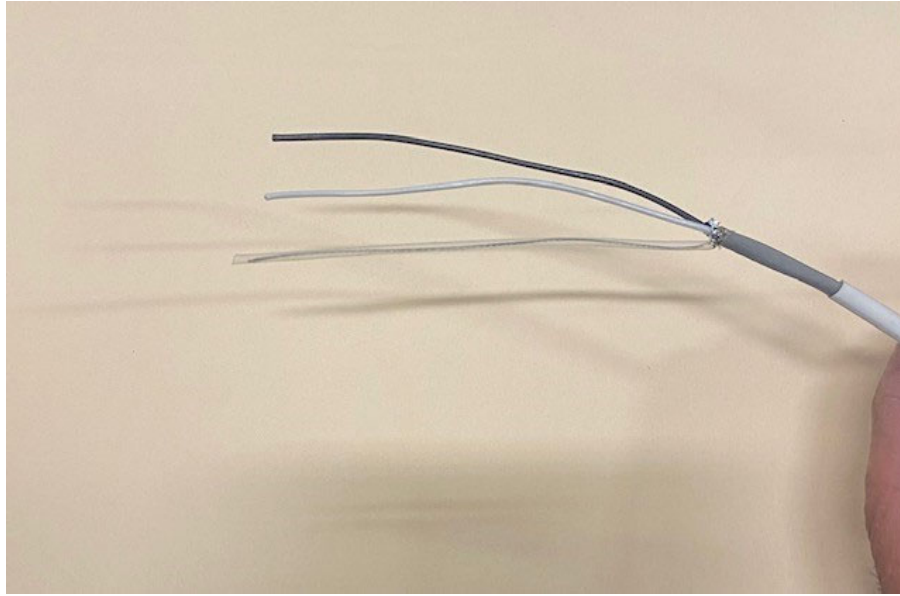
Drain Wire Covered with 3/32" Shrink Tubing
